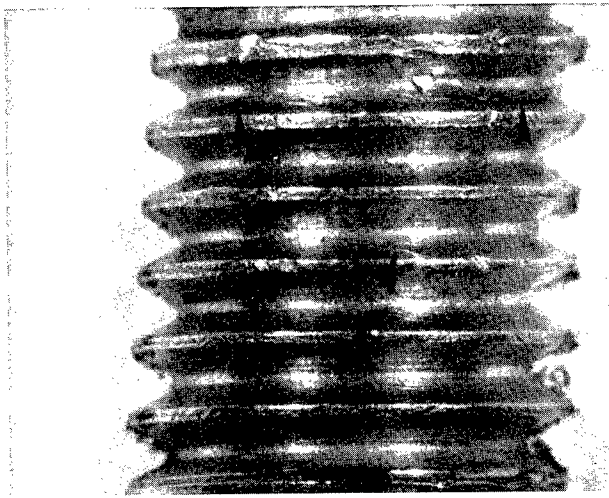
Rolled threads on bolt. Arrows mark defects. Mag: 8x
